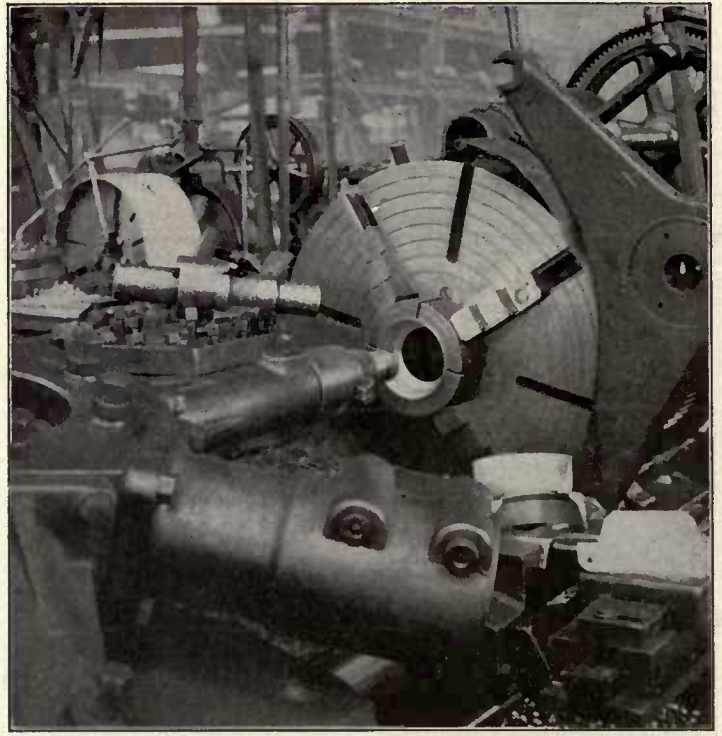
Finishing the Inside of the Two-Part Piston Rod Vibrating Cup.
